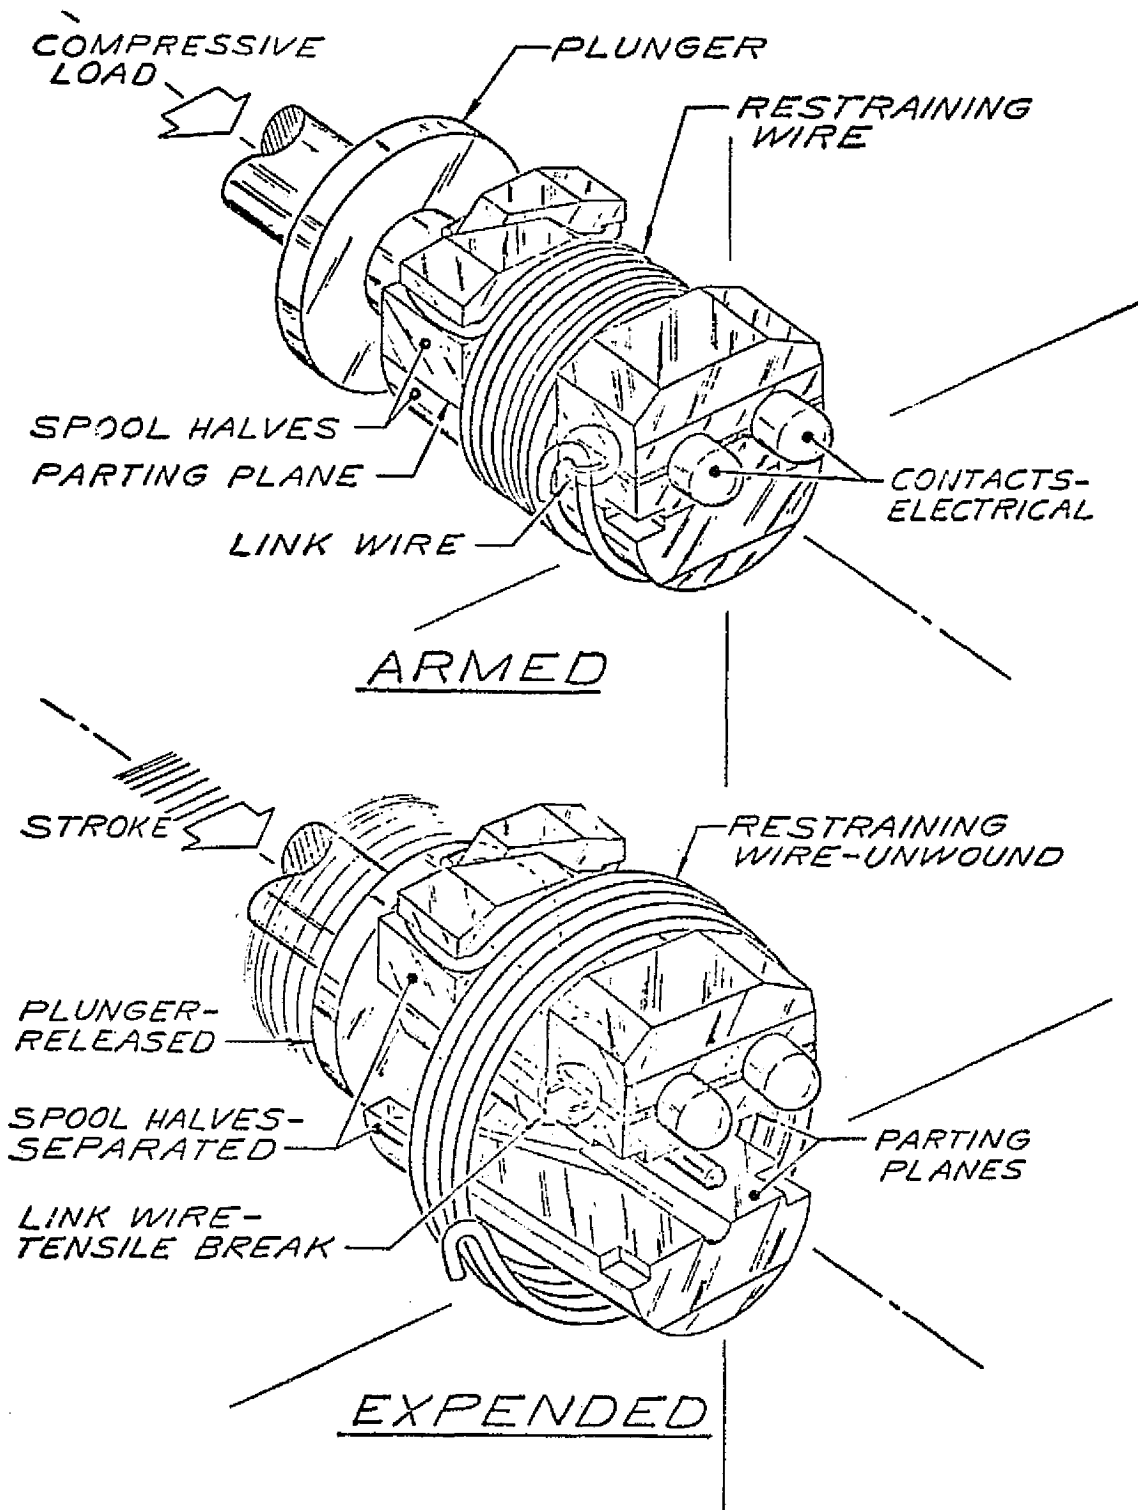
Typical Non-Explosive Initiator Utilized To Release a Spring Latch System.
